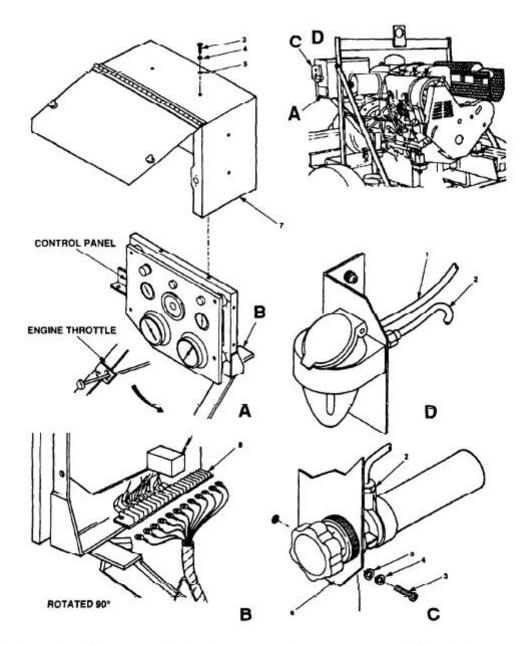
Wiring Harness Testing (Models 350 PAW and W-87012). (sheet 1 of 2) 4-74 Change 2
